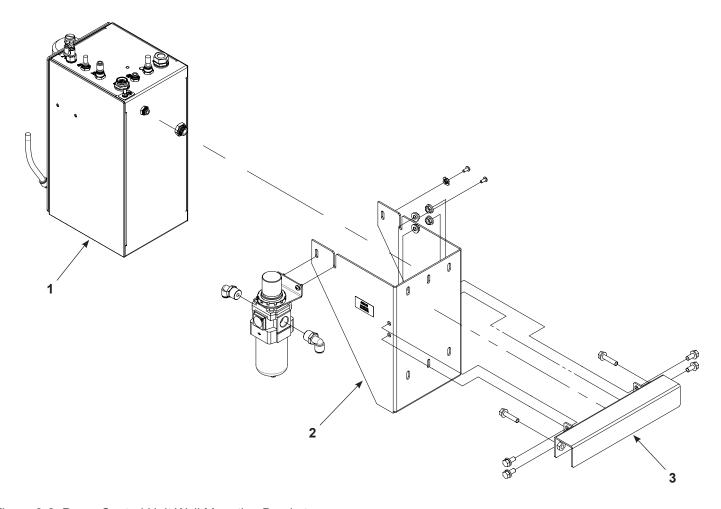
Pump Control Unit Wall Mounting Brackets
